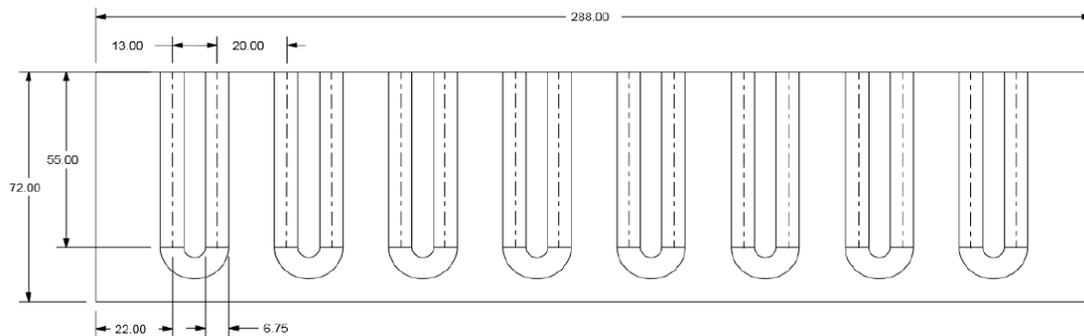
Dimensions of the radiant "U-Tube" burners installed for 500 kW power.
